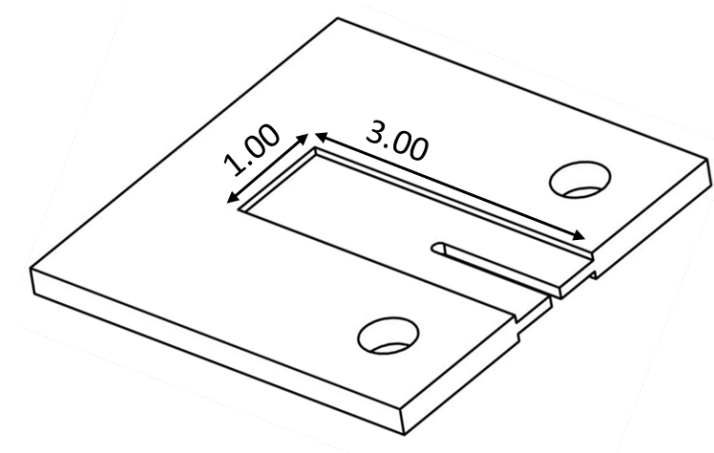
3D view of Stepped specimen geometry. Dimensions are in inches.
